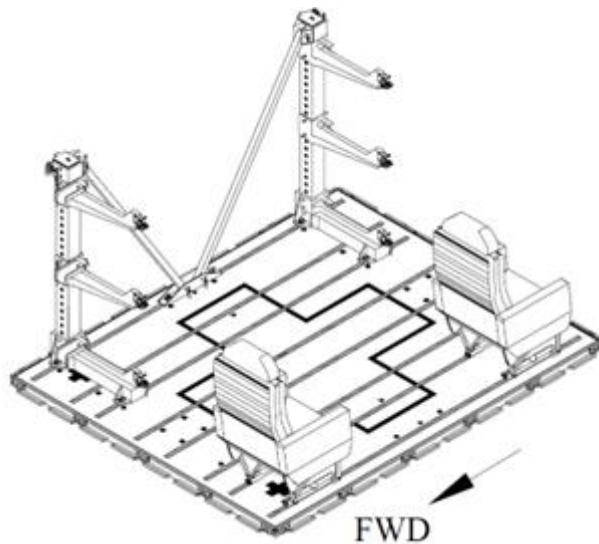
PSP-M.3.6. Stanchion Assembly.
